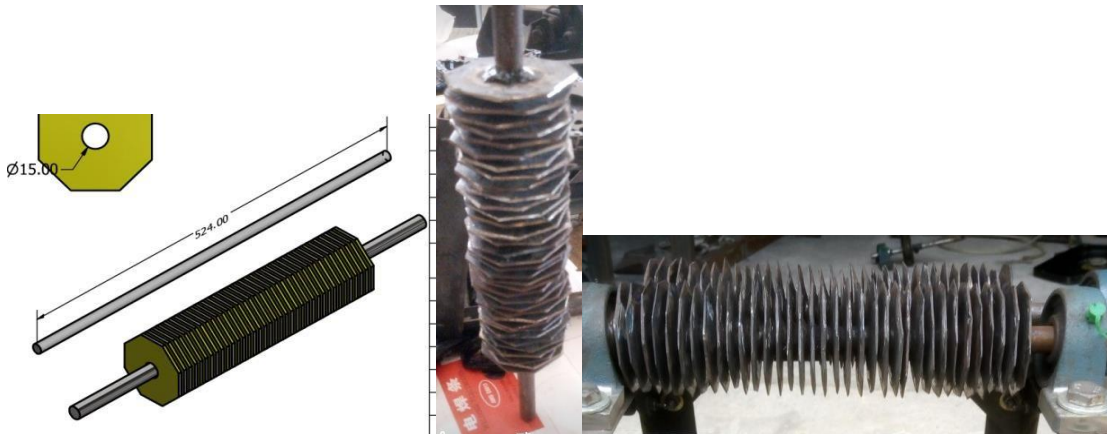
Shaft-blade assembly. Figure 11: Welded blades
